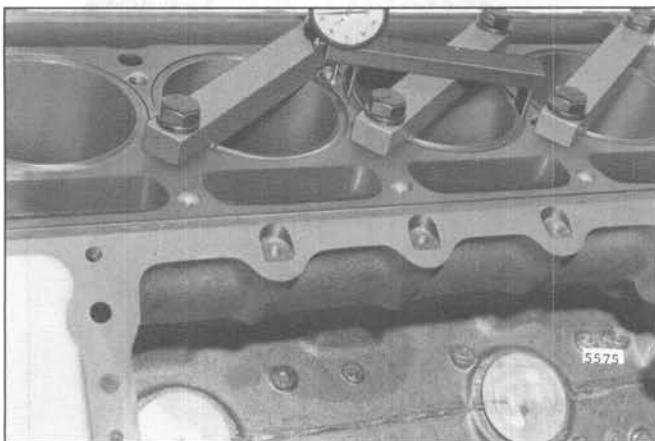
Checking Distance of Liner Flange Below Top Face of Block using Clamp J 24565-02 and Gage J 24898
